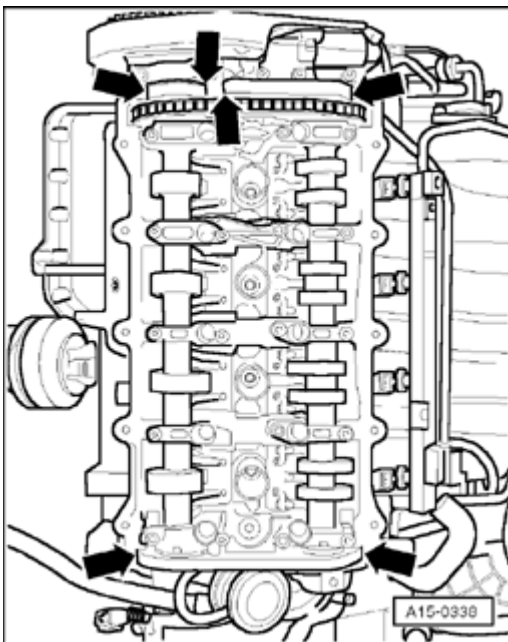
Applying Thin Layer Of Sealant To Edges Of Sealing Surfaces Between Bearing Cap And Cylinder Head
